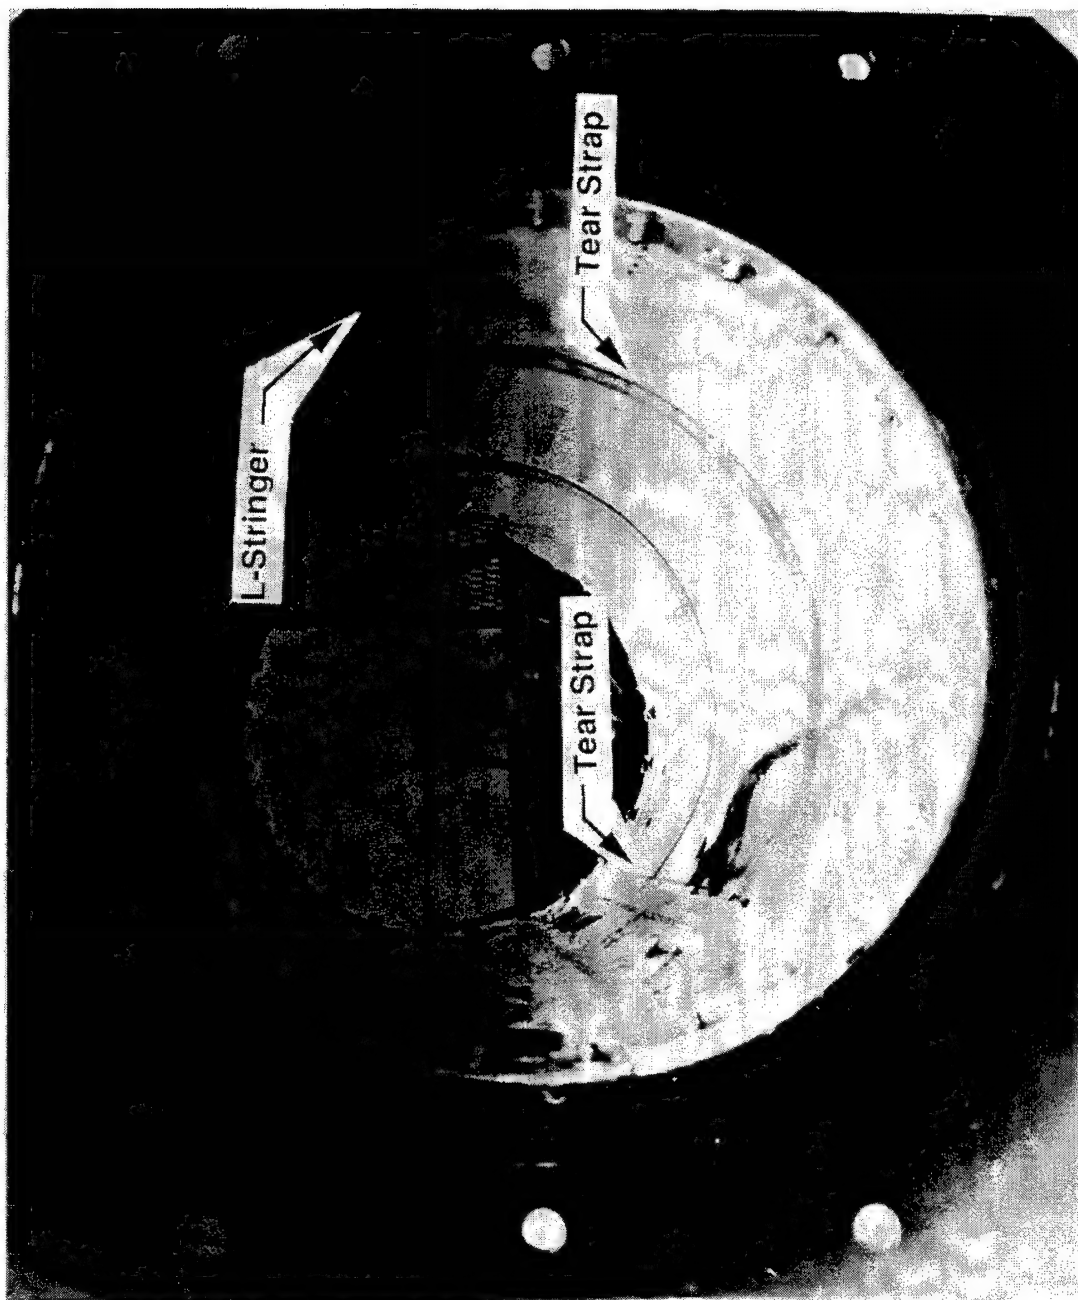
INSIDE VIEW OF SPECIMEN (TYPE C-3)
